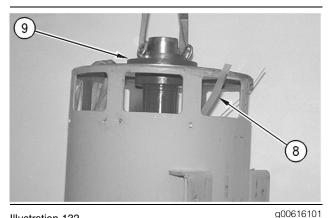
400 Frame Single Bearing Generator (8) Protective strip (9) Drive coupling
